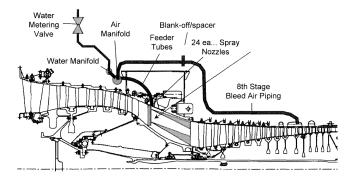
Cross Section of LM6000 Sprint Intercooled Engine. (Courtesy of GE SSEP)
